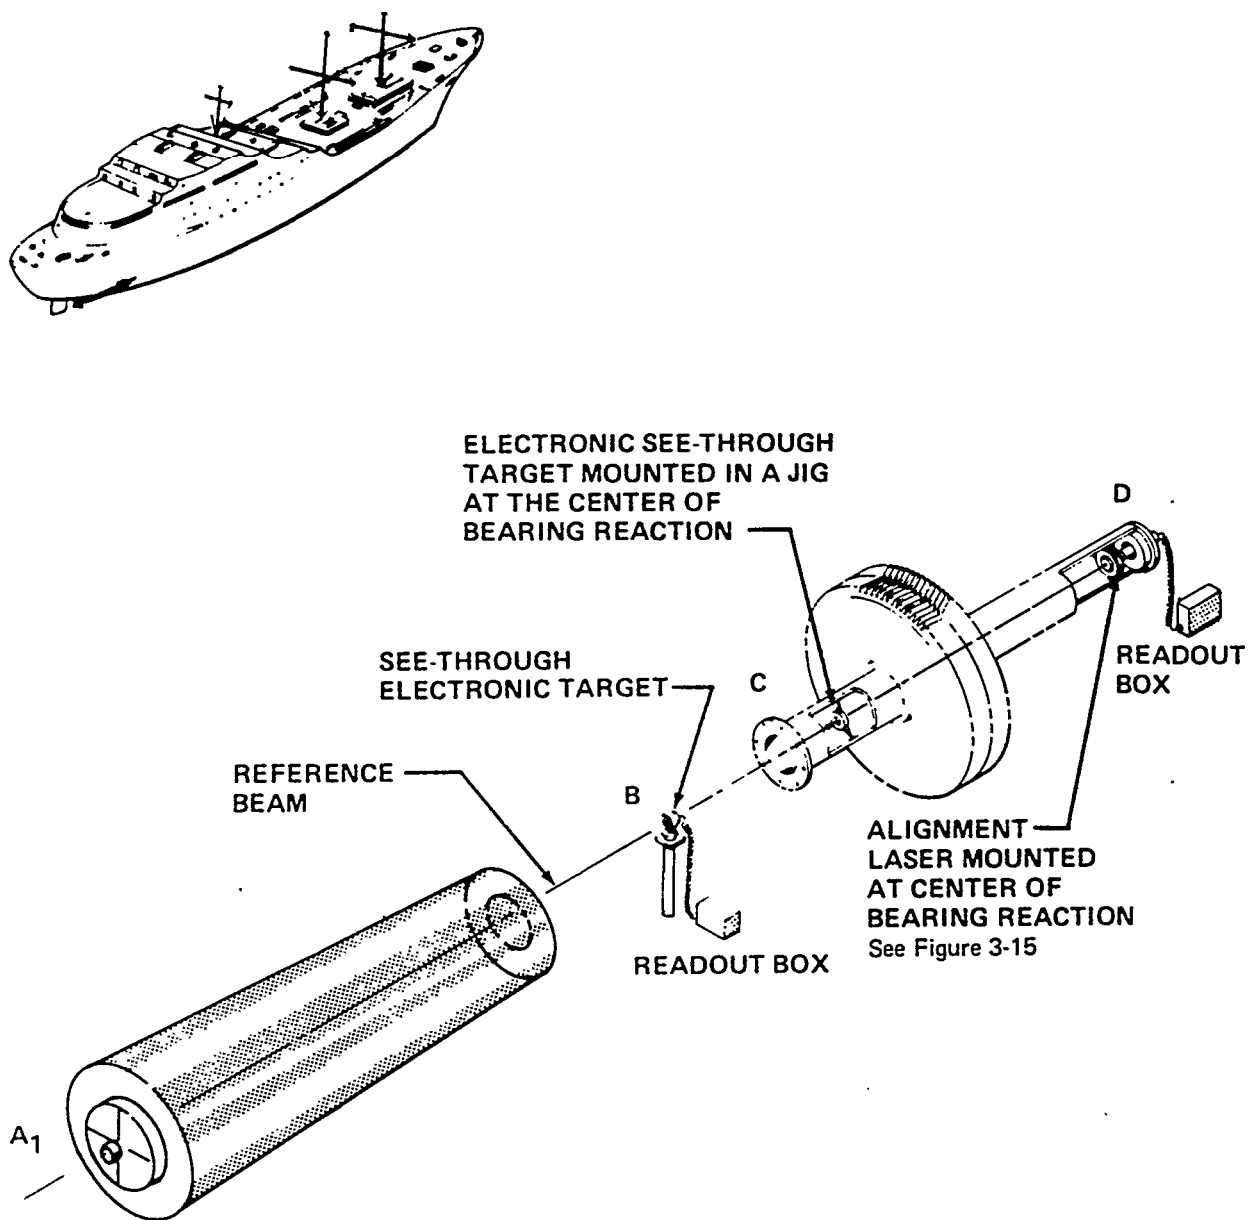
Establishing a Reference Line First Positioning Reduction Gear (Hollo Shaft)
